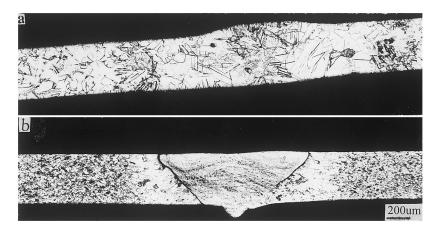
Welded joint low-powered microstructure of Ti welding samples (a) EBW; (b) LBW.
